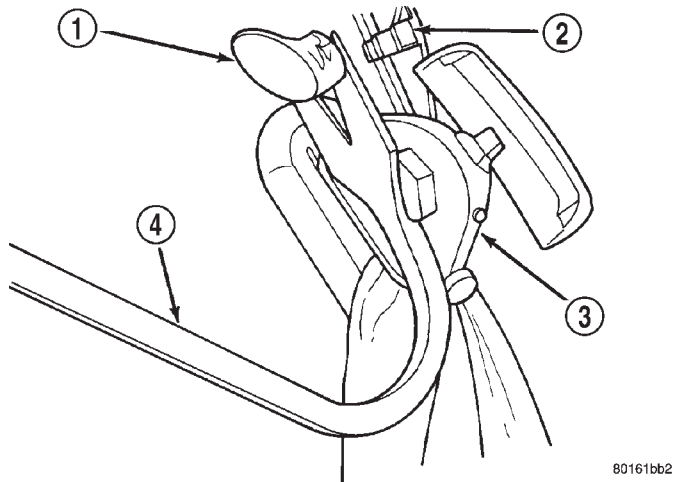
Turning Loop Height Adjuster Knob Removal - Typical
